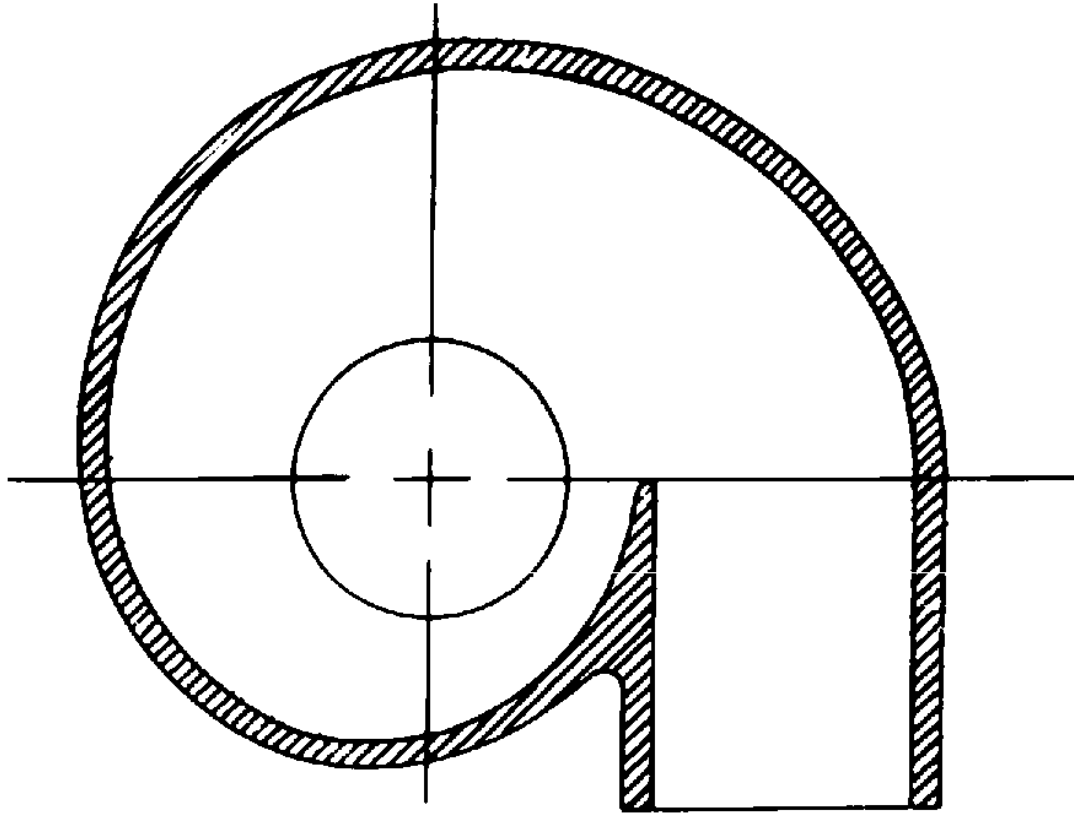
TYPICAL SINGLE VOLUTE CASING
